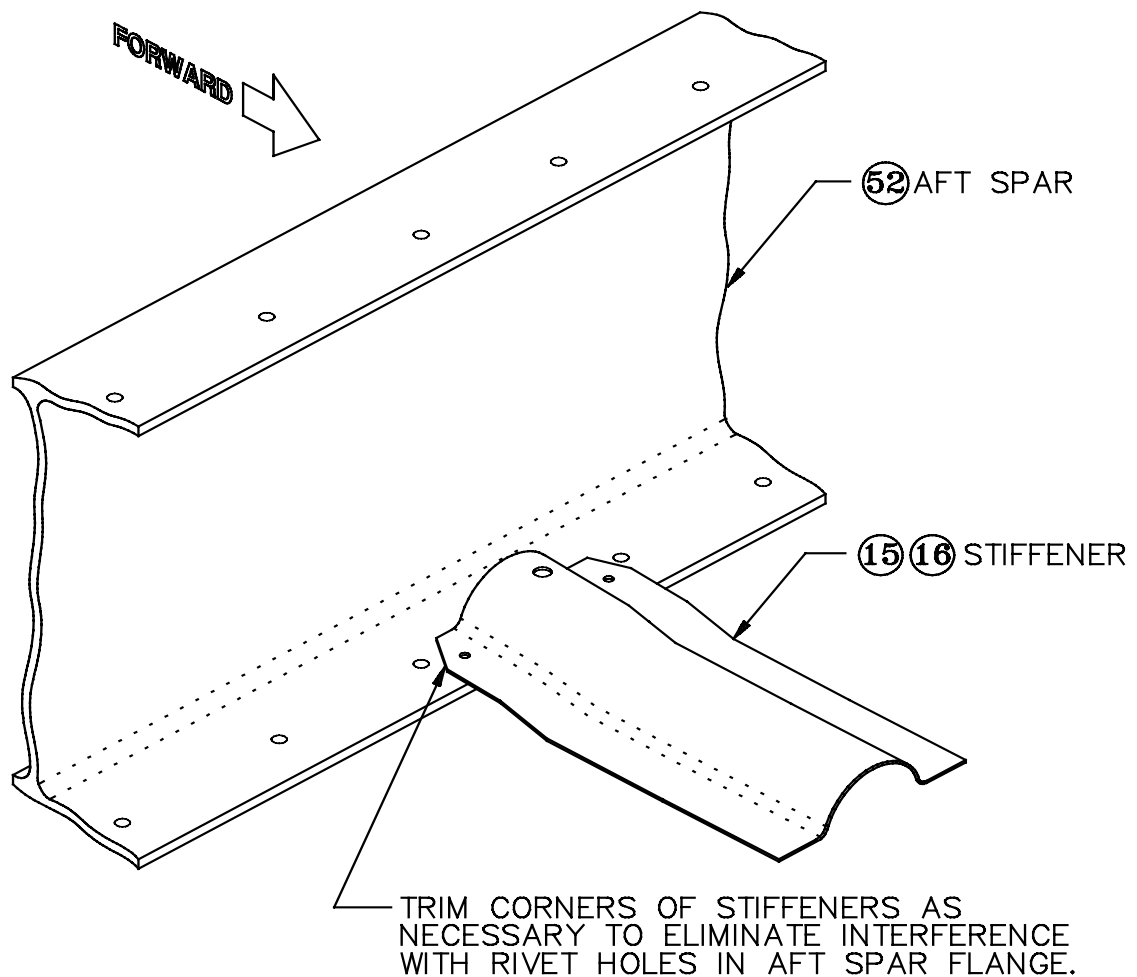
Relieve Stiffener Flanges for Rivet Clearance
